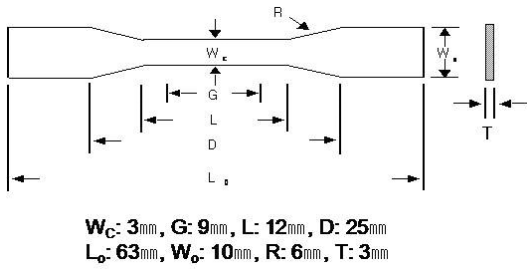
Dimensions of tensile test specimen (ASTM D 638-08).
